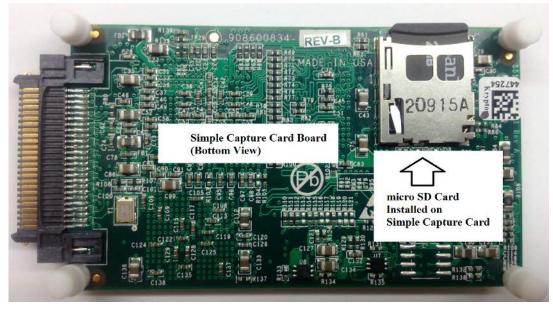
Bottom View of Simple Capture Card Board with microSD Card Installed
